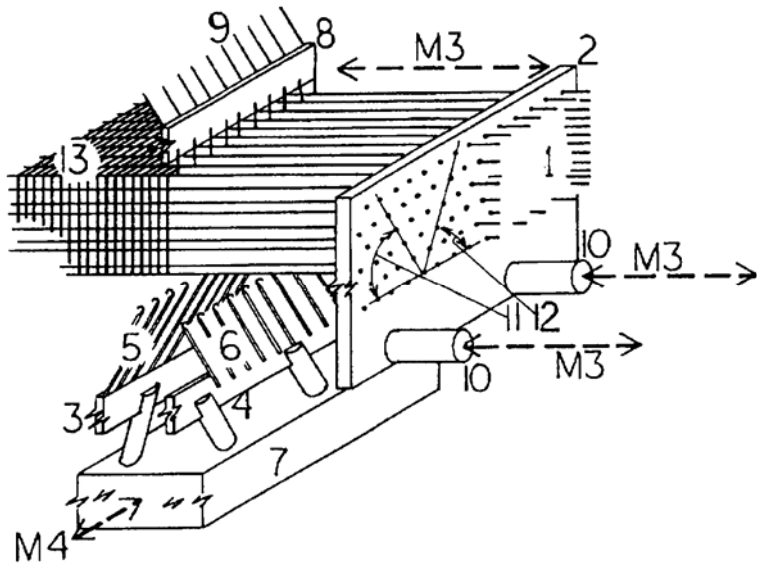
Schematic preview of hybrid weaving/knitting machine with selected parts [1,2].
